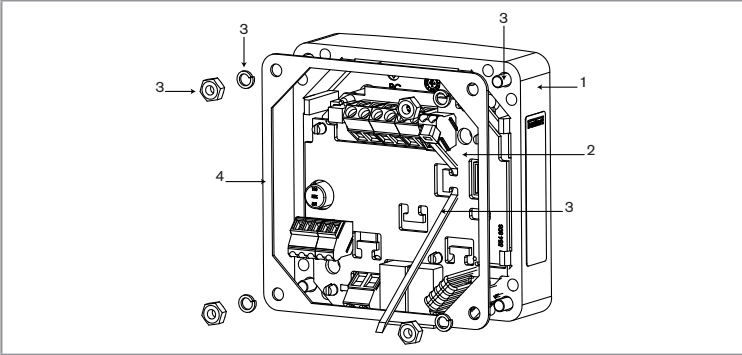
Exploded view of the spare parts of a 8025, panel-mounted version
